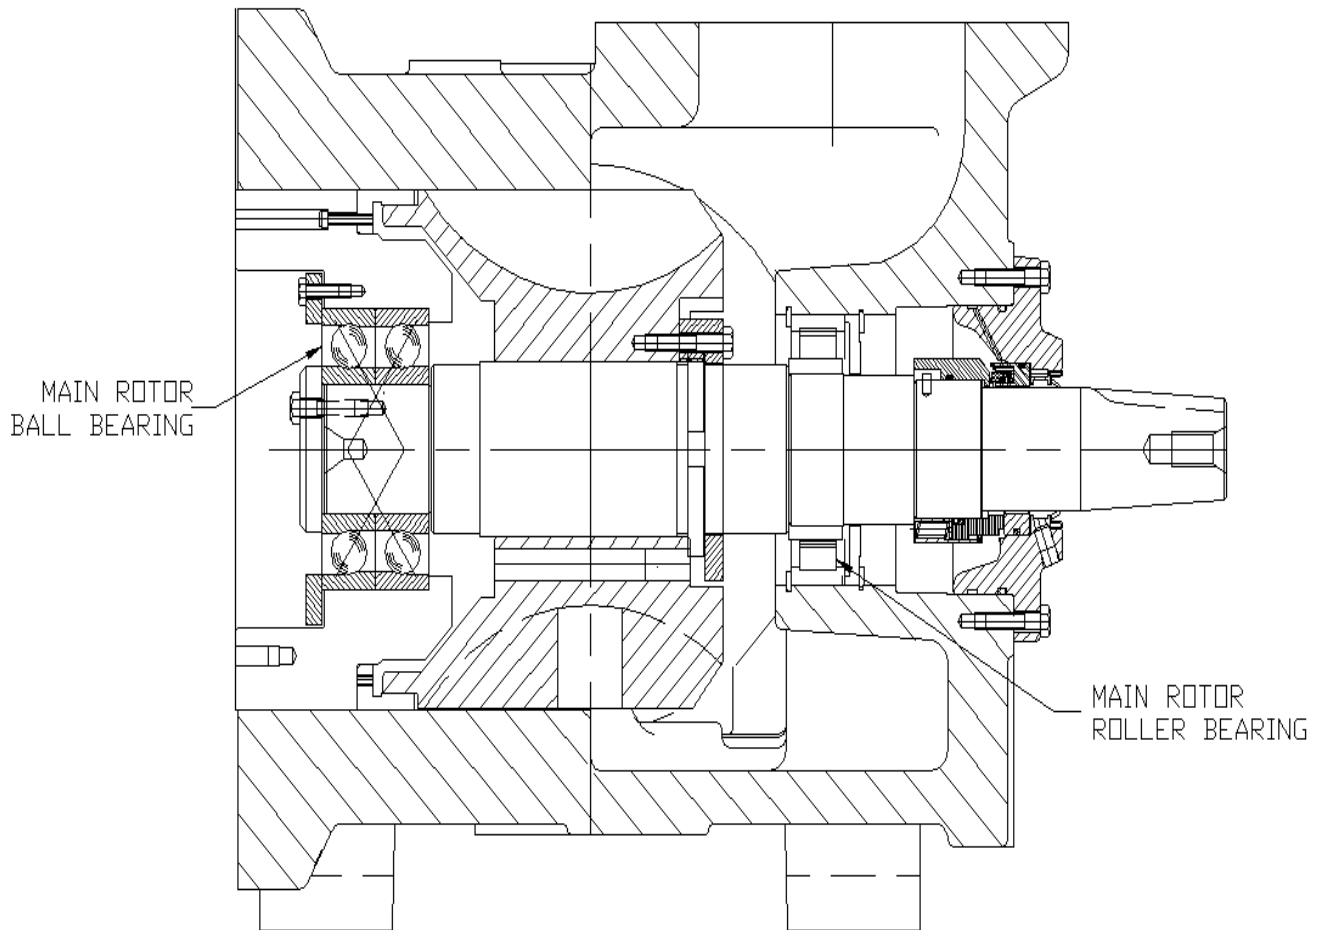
Main Rotor Cross-Section VSS/VSMC Compressors
